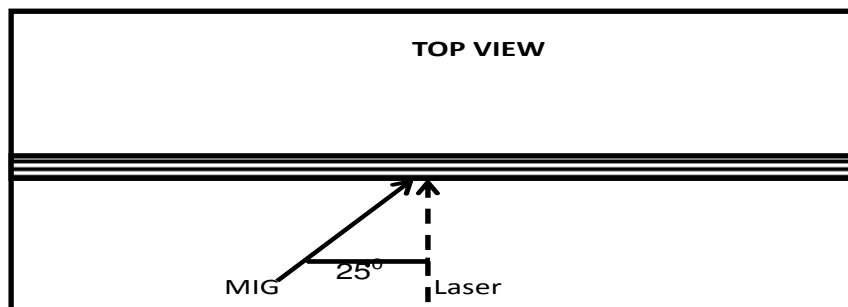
Horizontal position of t-joint hybrid laser arc welding.
